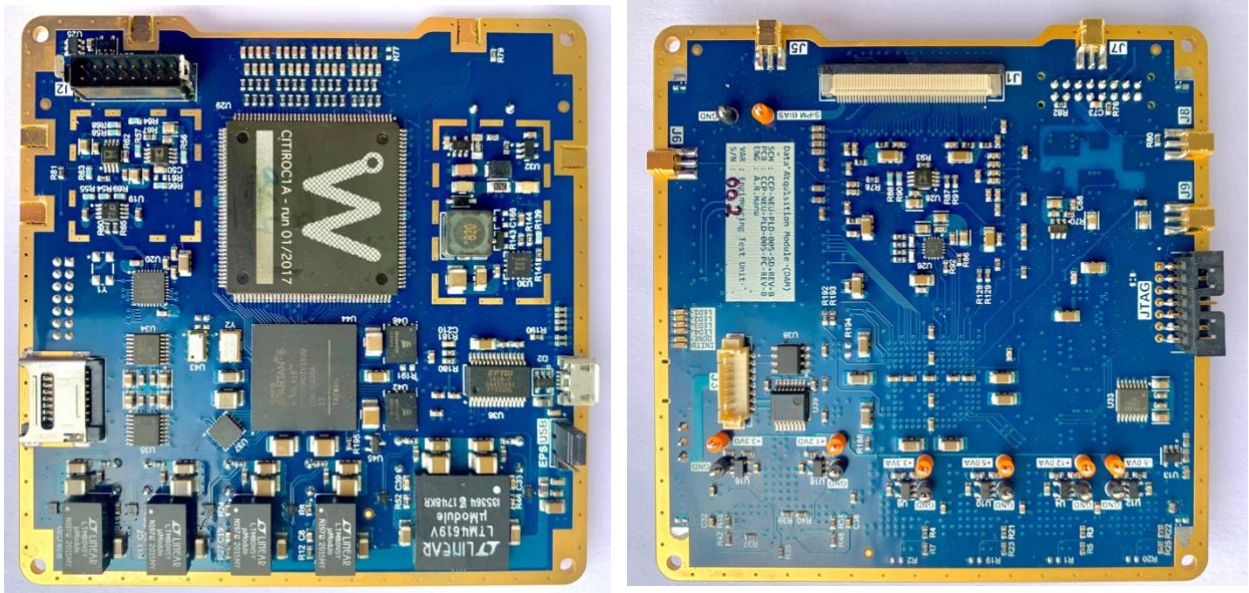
PCB top view (left) and bottom view (right) of the DAM, fabricated December 2020.
